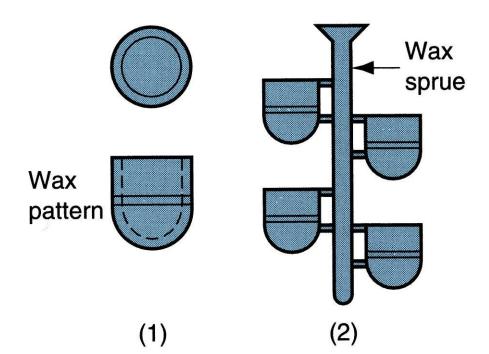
Steps in investment casting: (1) wax patterns are produced, (2) several patterns are attached to a sprue to form a pattern tree
